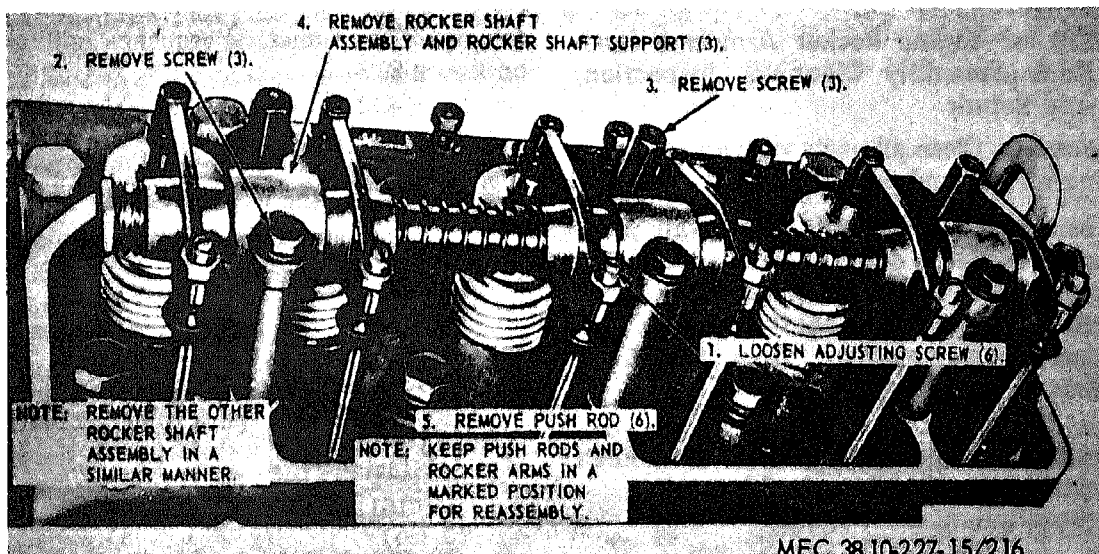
Carrier engine rocker arm shaft and pushrods assembly, removal and installation.
